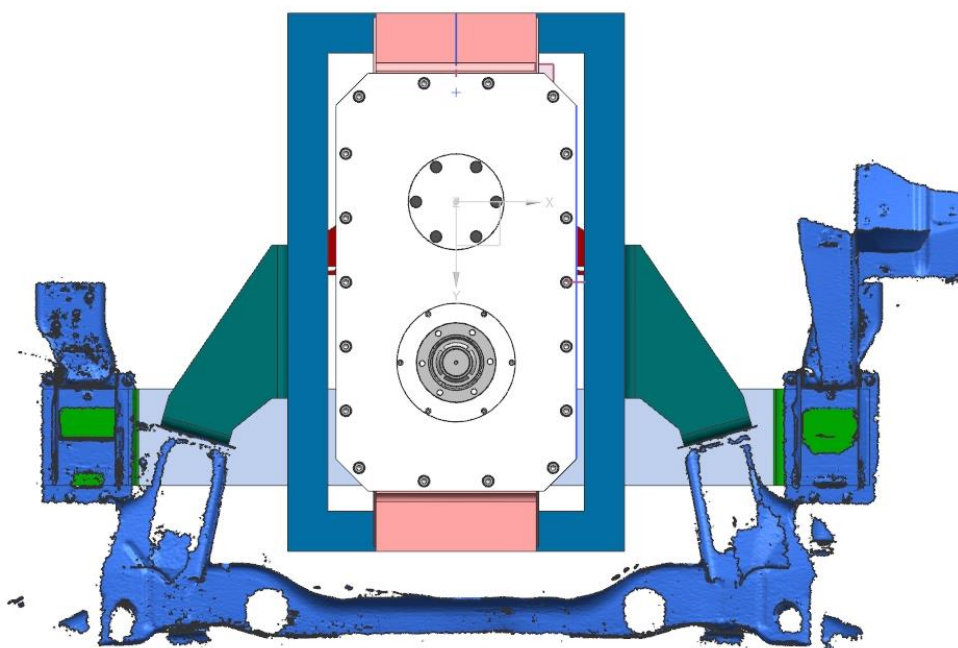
Orthogonal view of the gearbox mounted on the chassis of the vehicle
